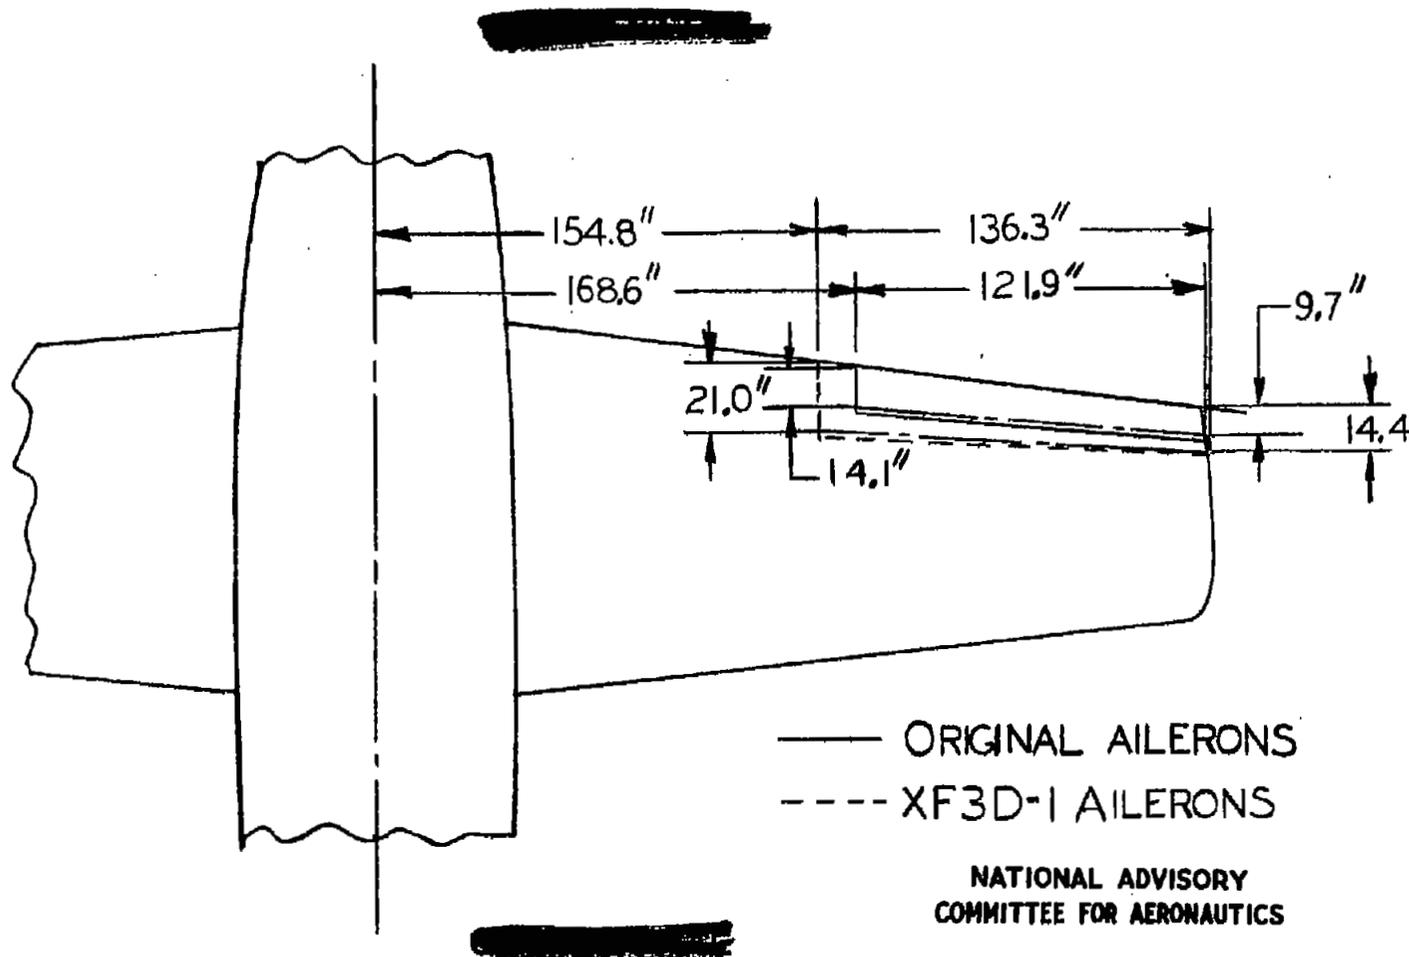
SKETCH SHOWING DIMENSIONAL DIFFERENCES IN THE TWO SIZES OF AILERONS TESTED ON THE MODEL. DIMENSIONS ARE FULL-SCALE.
